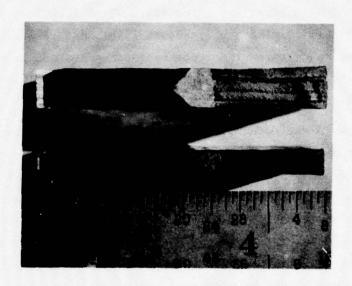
FAILURE SURFACES OF UHC STEEL LAMINATE AND SHEET CRACK DIVIDER CT SPECIMENS: (UPPER) DIFFUSION BONDED LAMINATE DUHC 1; (LOWER) SHEET.
